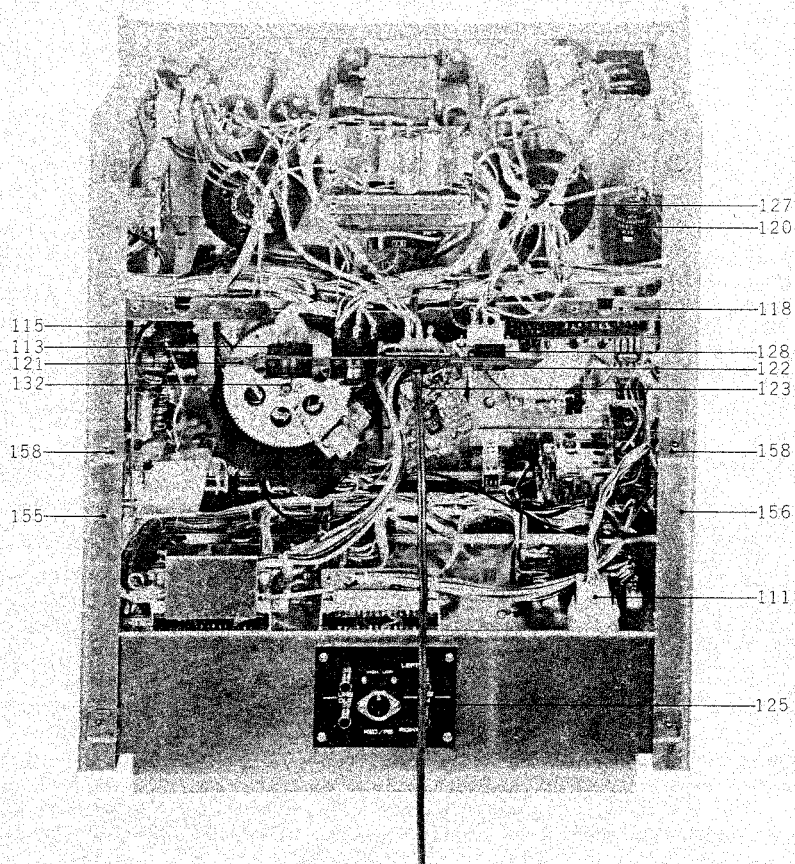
(C) PHOTO OF MECHANISM ASSEMBLY BLOCK
